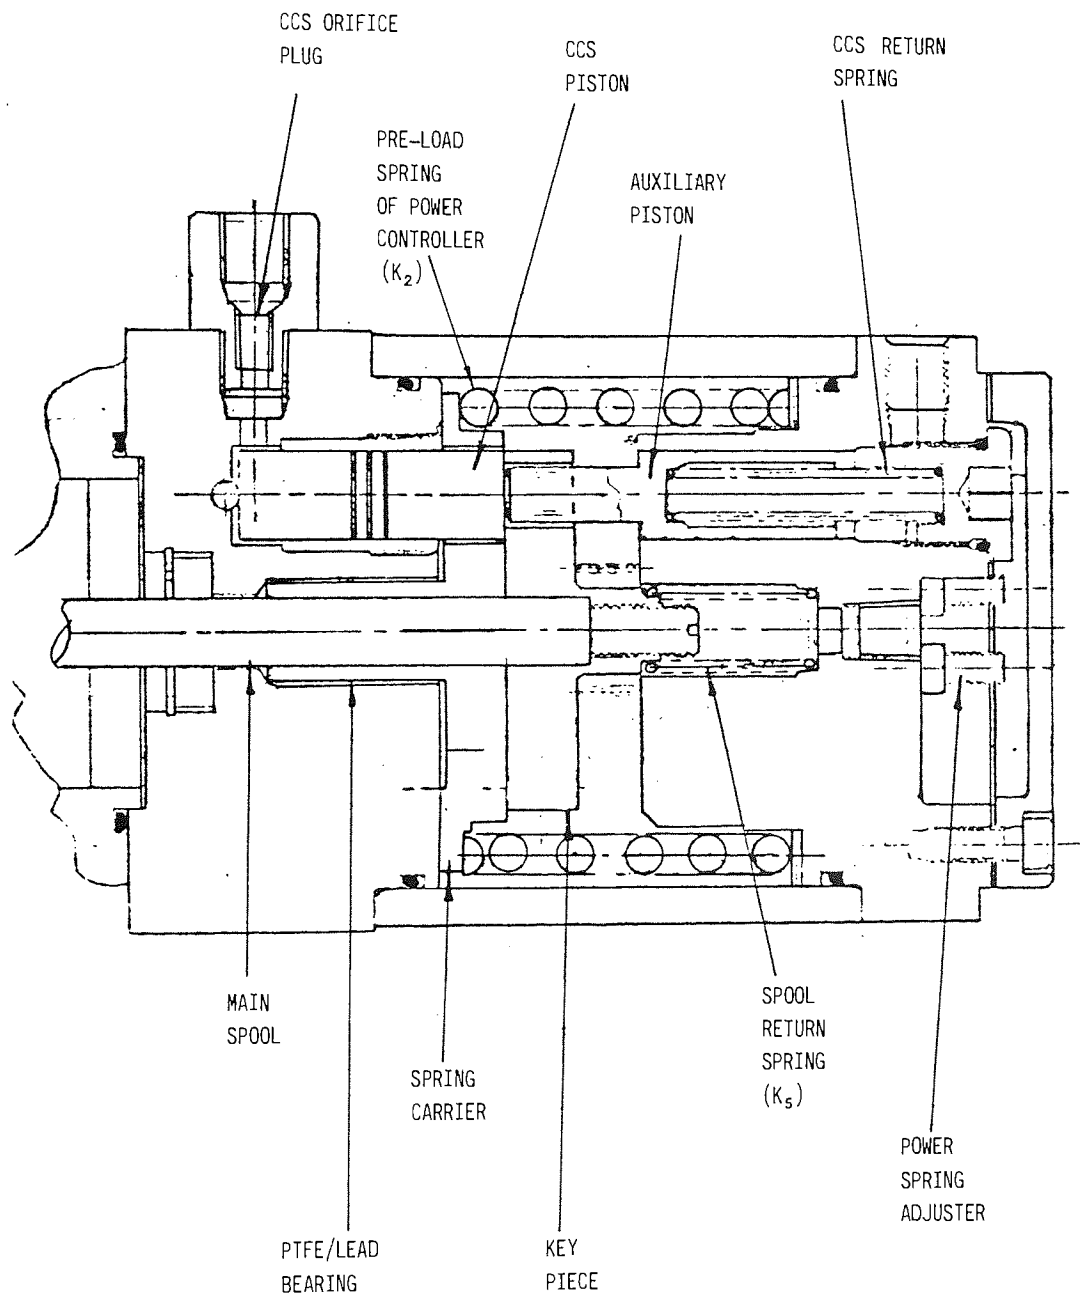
AN ASSEMBLY DRAWING OF THE HYDRO-MECHANICAL CONTROLLER PACKAGE SHOWING THE CCS PISTON DESIGN
